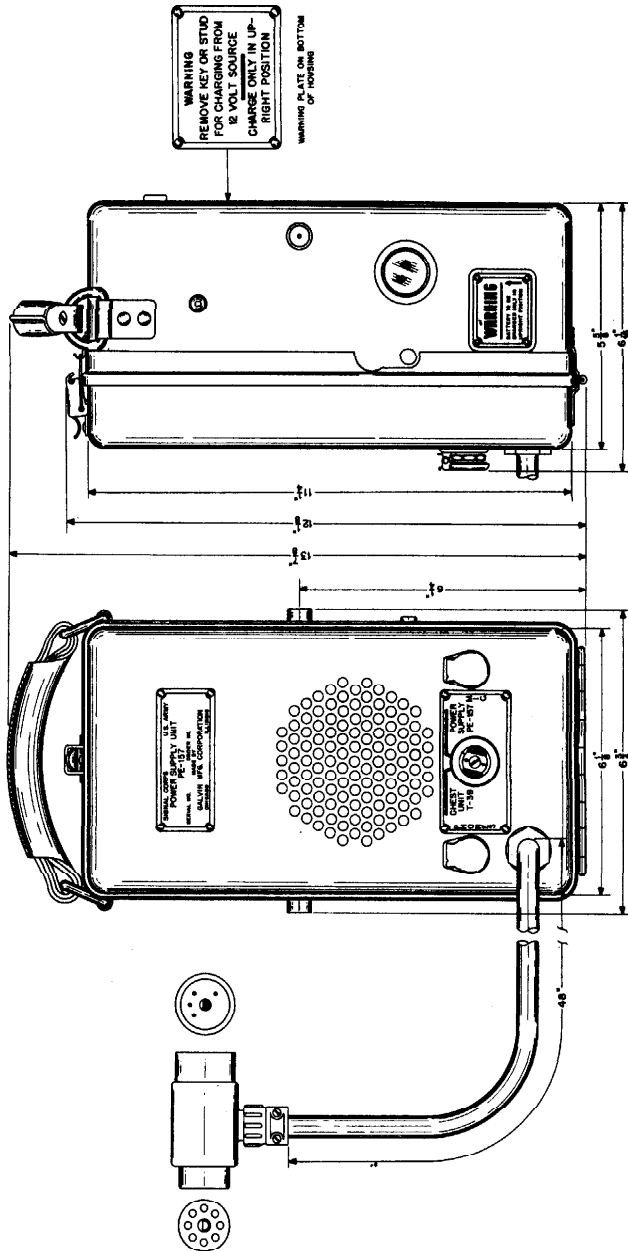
Power Supply Unit PE-157-(\*), Outline Dimensional Detail
